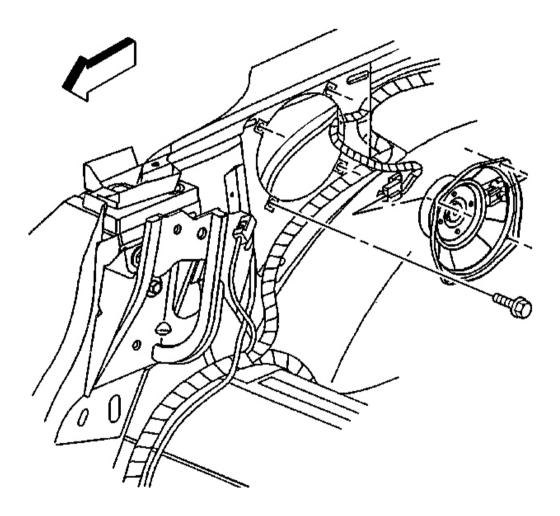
Electrical/Audio Connector At Rear Speaker & Screws Courtesy of GENERAL MOTORS CORP.
